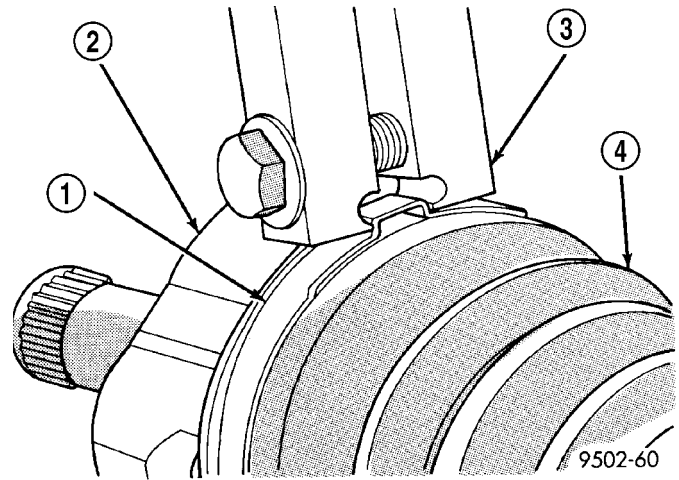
Crimping Tool Installed on Sealing Boot Clamp
